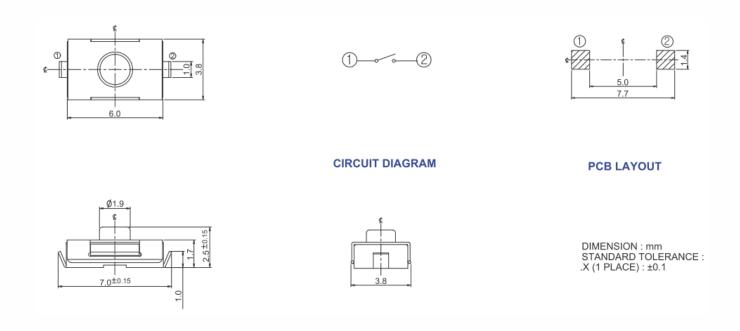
222GJ...S, Surface Mount J Bend Terminal
